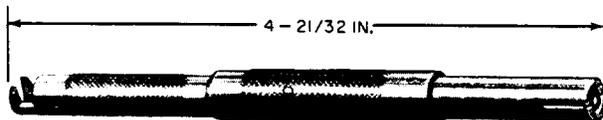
KS-19092, L1, Insertion and Extracting Tool
